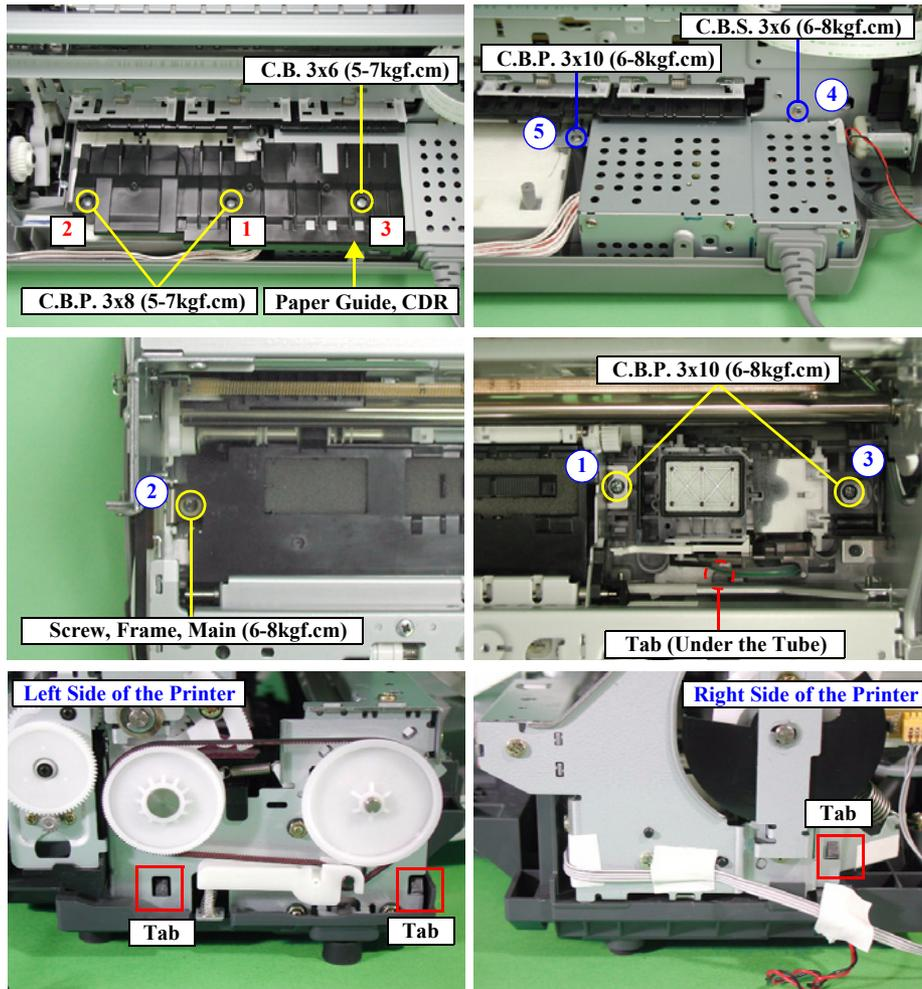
Printer Mechanism/Housing, Lower Removal
